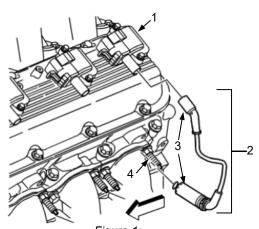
Ignition Coil (1), Spark Plug Wire (2), Spark Plug Wire Boots (3), Spark Plug (4)
